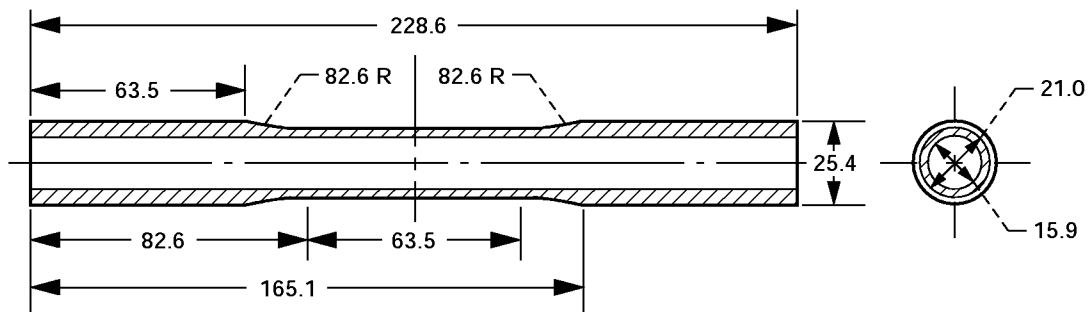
Typical specimen geometry (all dimensions are in millimeters).
